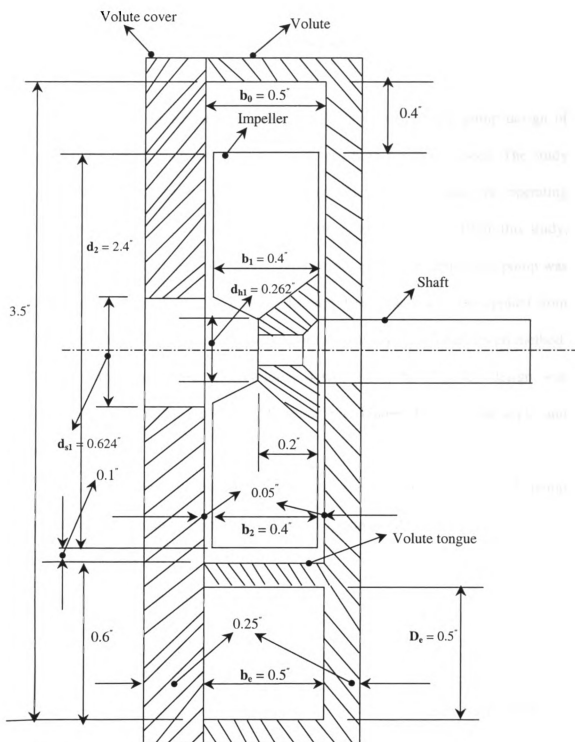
Un-conventional Centrifugal Pump Assembly
